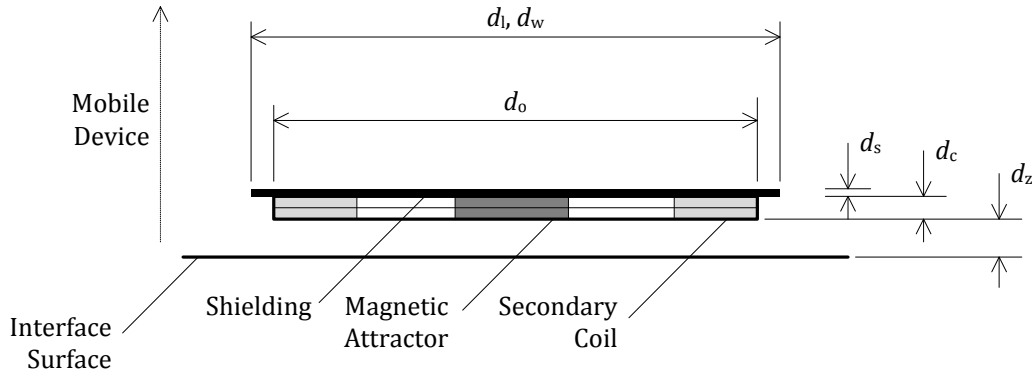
Secondary Coil and Shielding assembly of Power Receiver example 2
